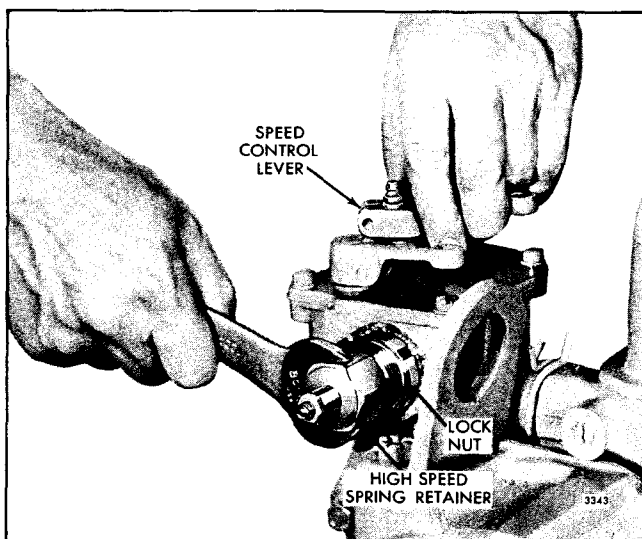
Adjusting Maximum No-Load Engine Speed (Type A)
